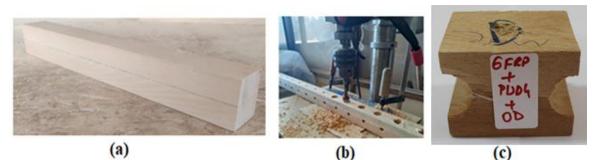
Manufacturing process for experimental samples: a) Slats, b) Hole drilling process, c) Test samples
